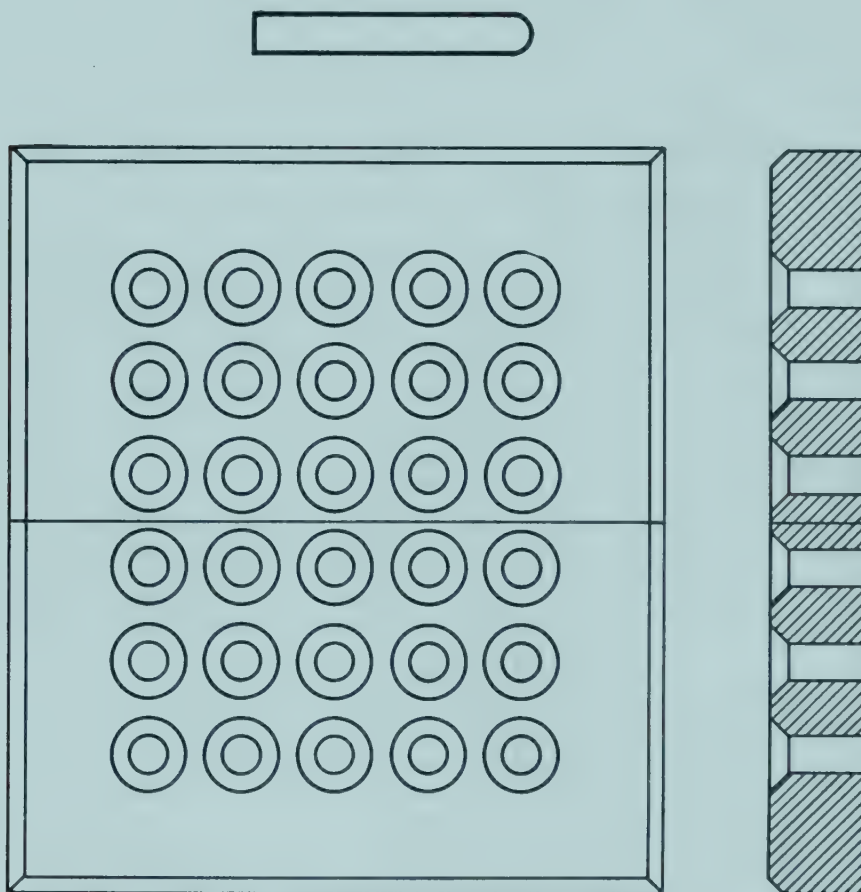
Pin board for work economy study. The board is 7 in. by 8 in. with $\frac{3}{8}$ in. holes 1 in. on center and countersunk to $\frac{3}{4}$ in. diameter. Pins are $\frac{3}{8}$ in. by 3 in. long.
